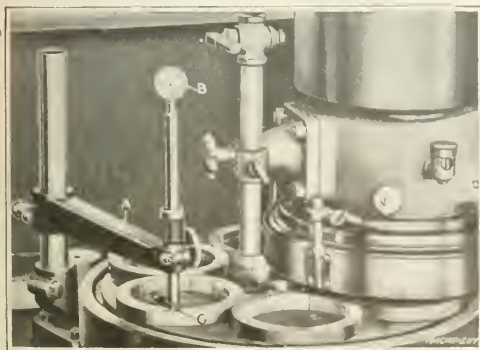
Continuous Reading Caliper for Use on Blanchard Vertical Surface Grinder
